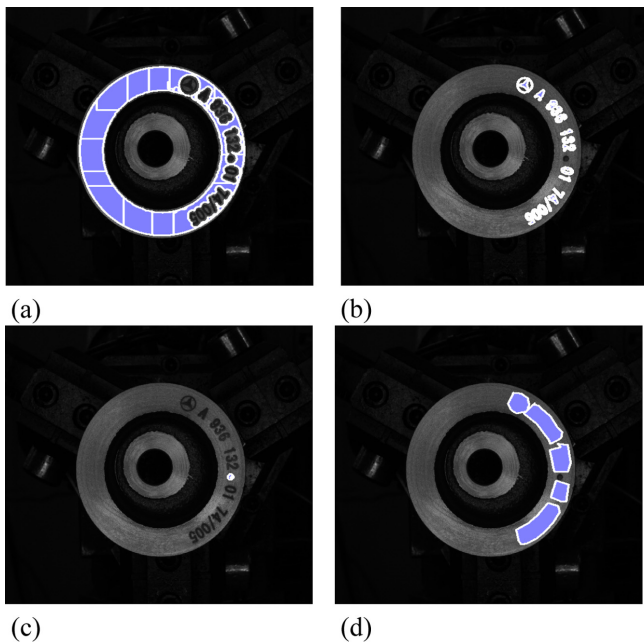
Teaching area for surface inspection: (a) Air pocket and dust inspection, (b) Part No. missing, (c) 2 Φ hole missing and displacement, (d) Part No. remarking
